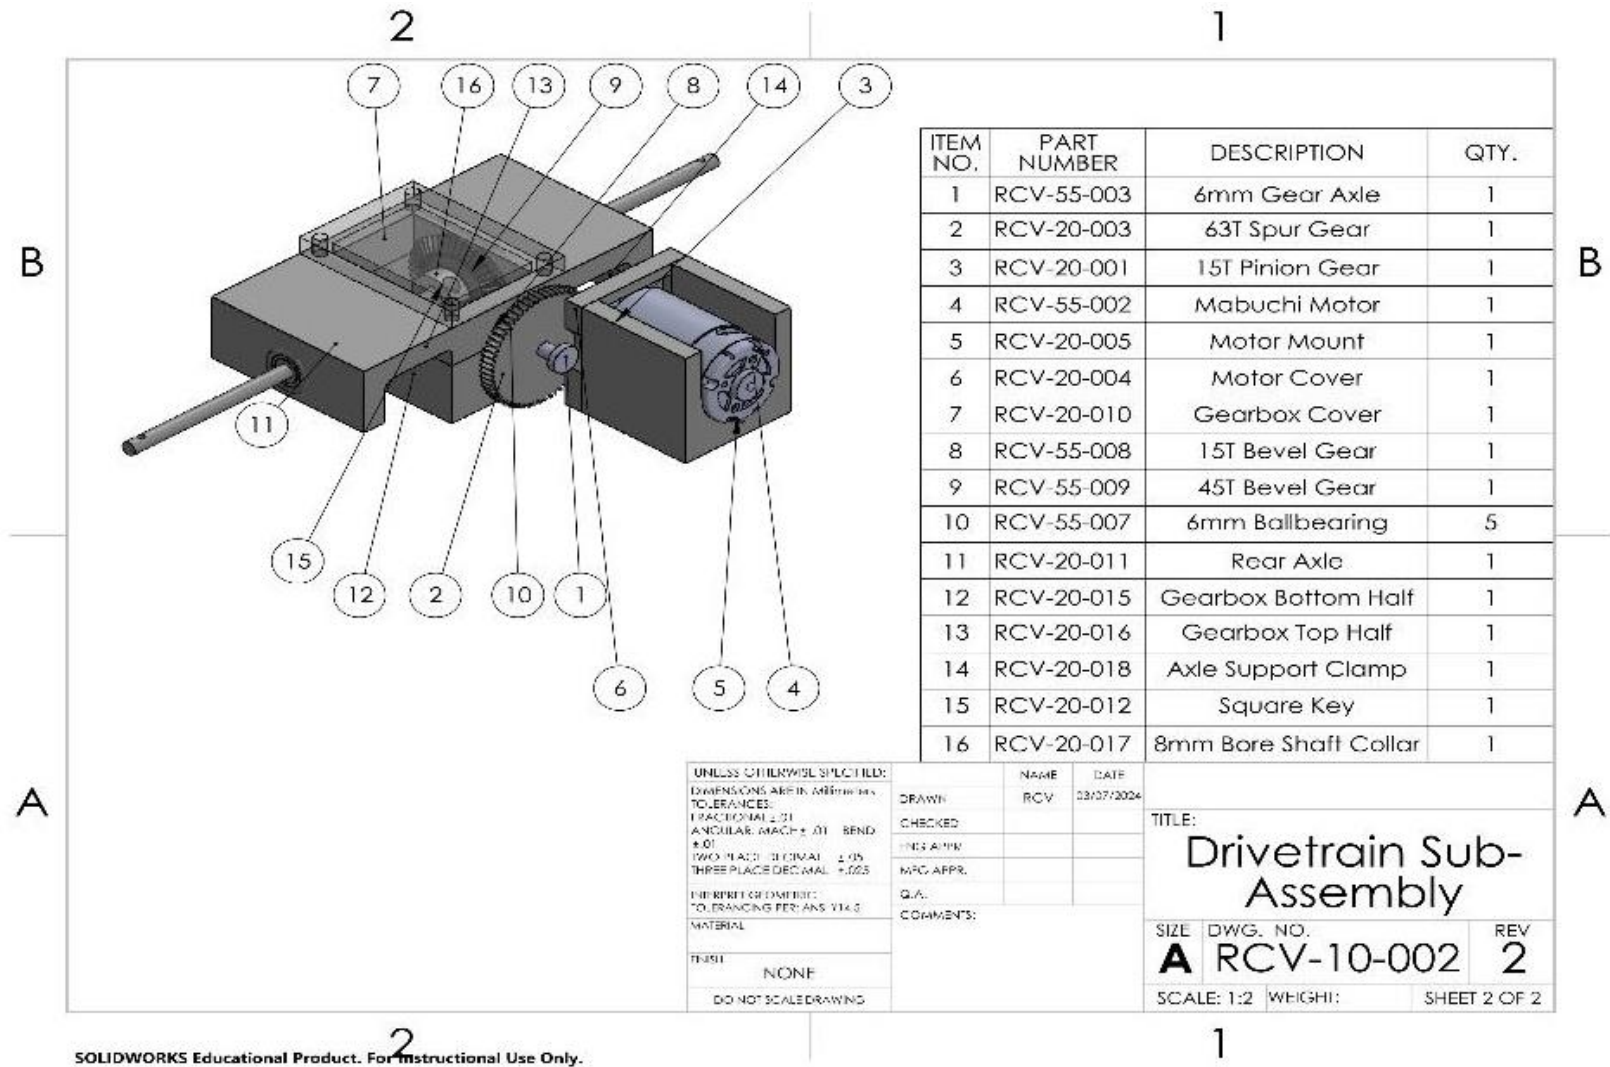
Drive Train Sub-Assembly drawing continued.
